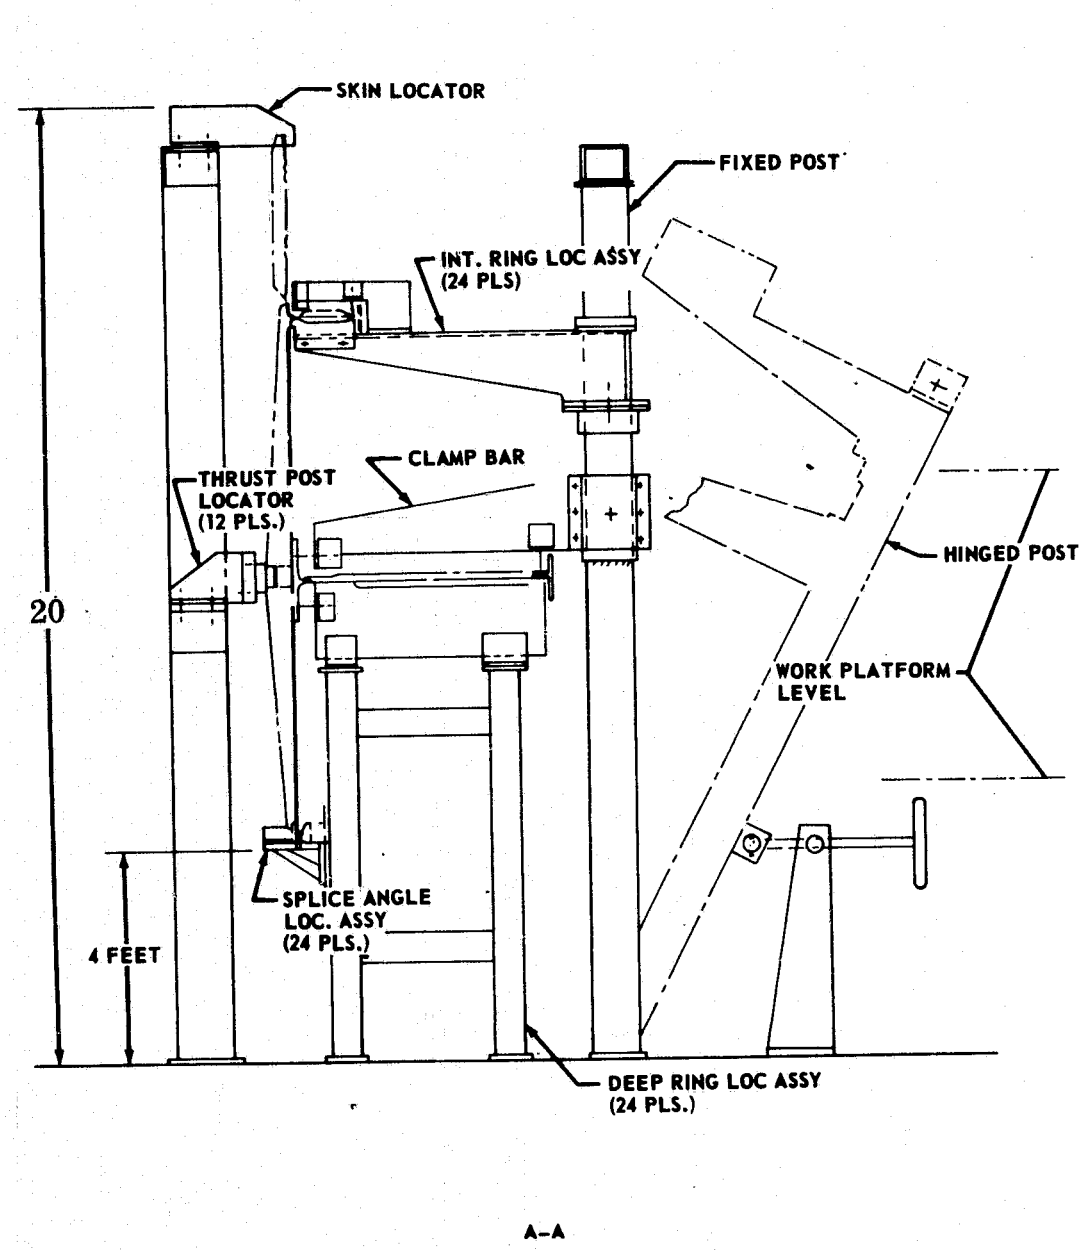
FORWARD SKIRT ASSEMBLY FIXTURE (AMLLV)
